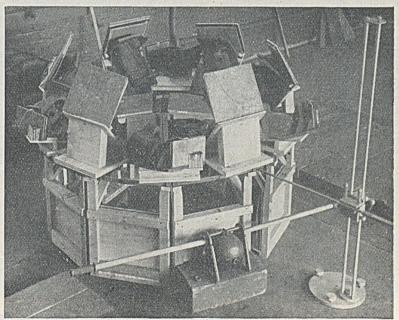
Assembly of Jigged Pivot Brackets for Gamma Radiography.
